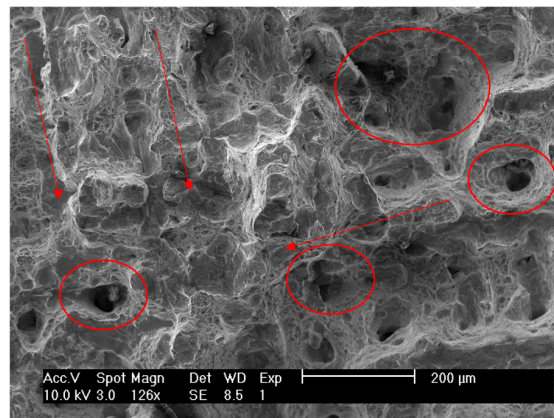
Fracture surface of SS/SM sample 3D-printed at 200 mm/s.
